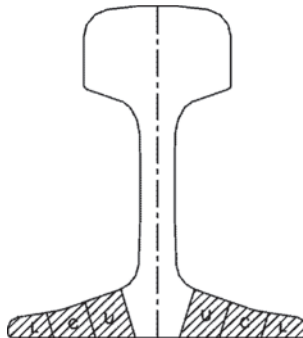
Standard A.T. Welded Rail Piece with Artificial Flaws for Sensitivity Setting of Ultrasonic Equipment to Examine A.T. Welds
